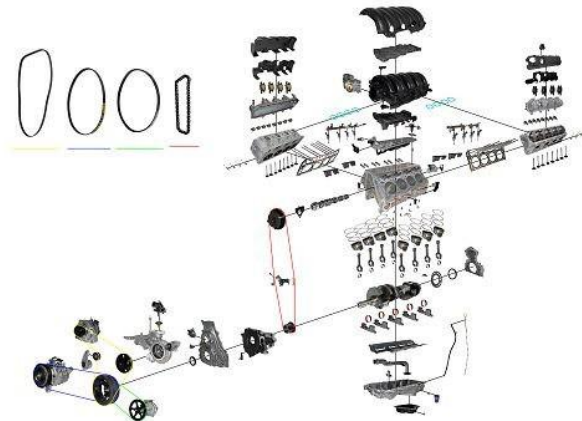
Baseline Chevrolet Silverado 5.3L Engine, Exploded View (A2Mac1)
